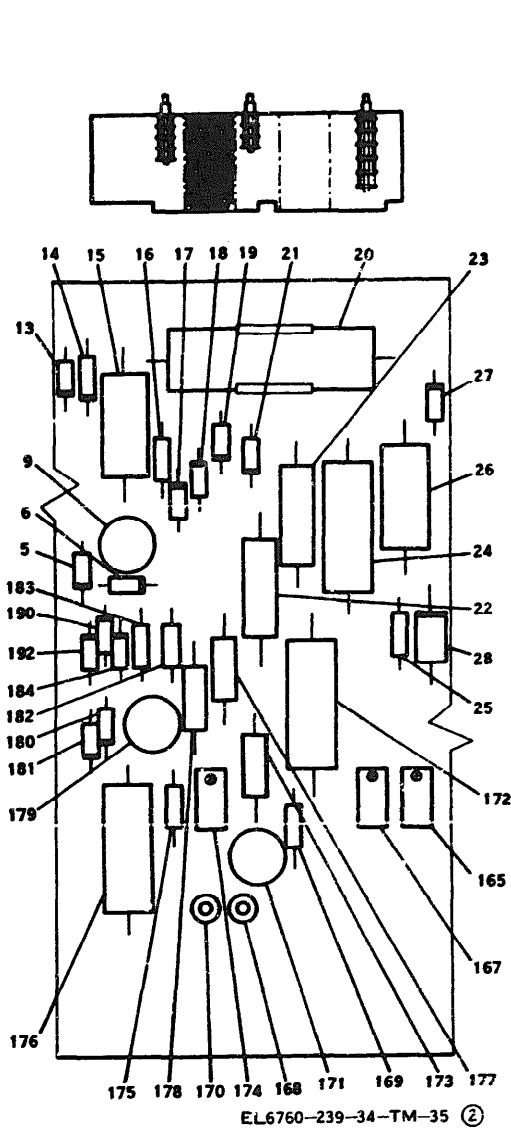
(2). Printed circuit board and component assembly A16, parts location (sheet 2 of 5).
